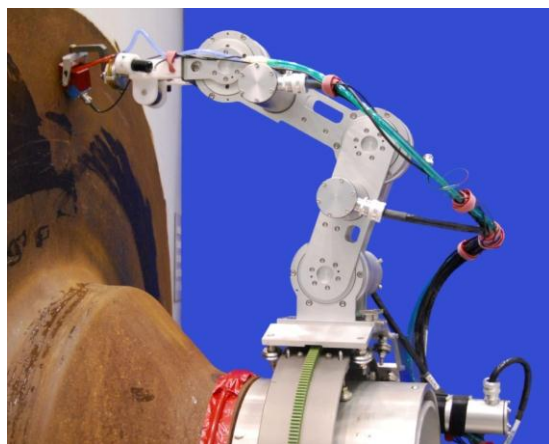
Inner Radius Scanner Installed on Feed-water Nozzle Mock-up
